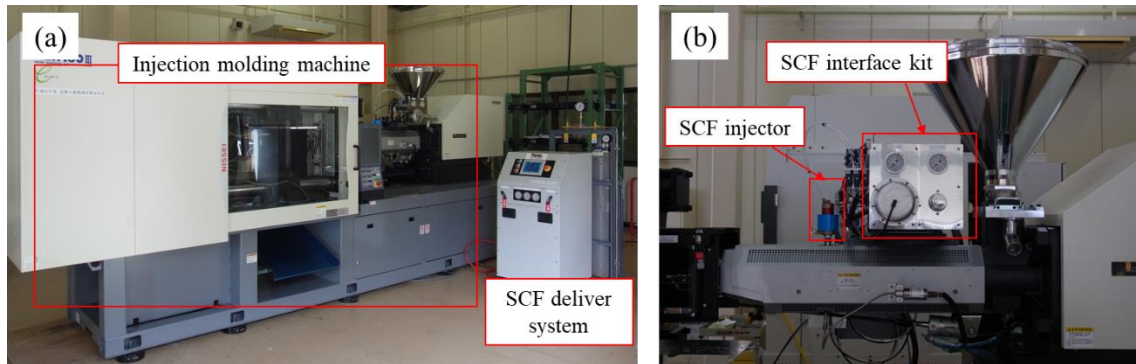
Appearance of (a) MIM machine and (b) SCF injector unit.
